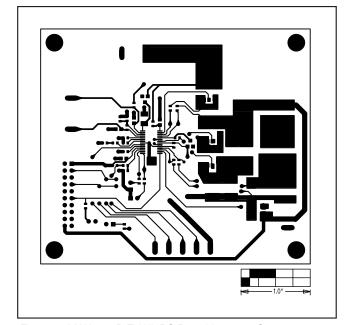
MAX1645B EV Kit PC Board Layout—Component Side
